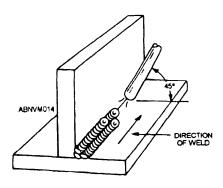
Fillet welding a T-joint (flat position).
